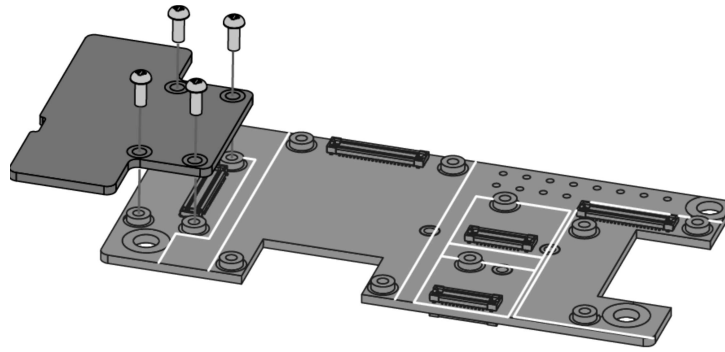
RAK19014 mounting mechanism on a WisBlock Base module
